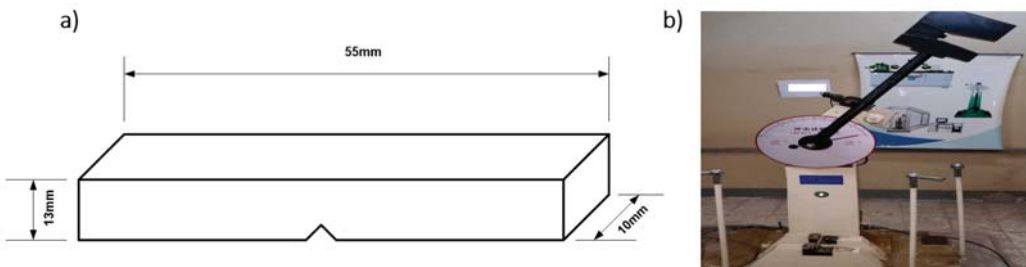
Charpy Impact test: (a) specimen geometry, (b) test setup.
